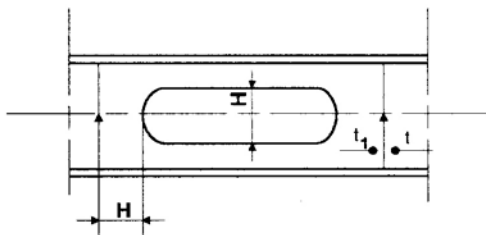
Stiffening of large openings in primary supporting members (insert plate)
